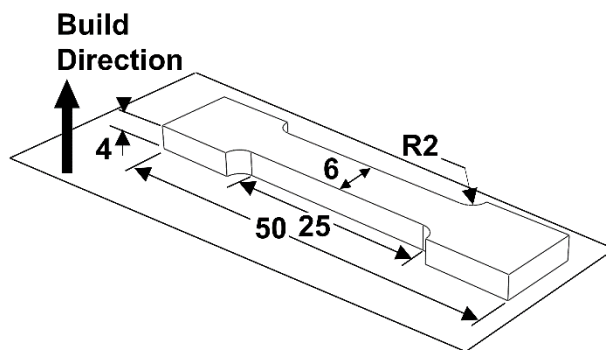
Tensile test specimen geometry and build direction. Dimensions in (mm).
